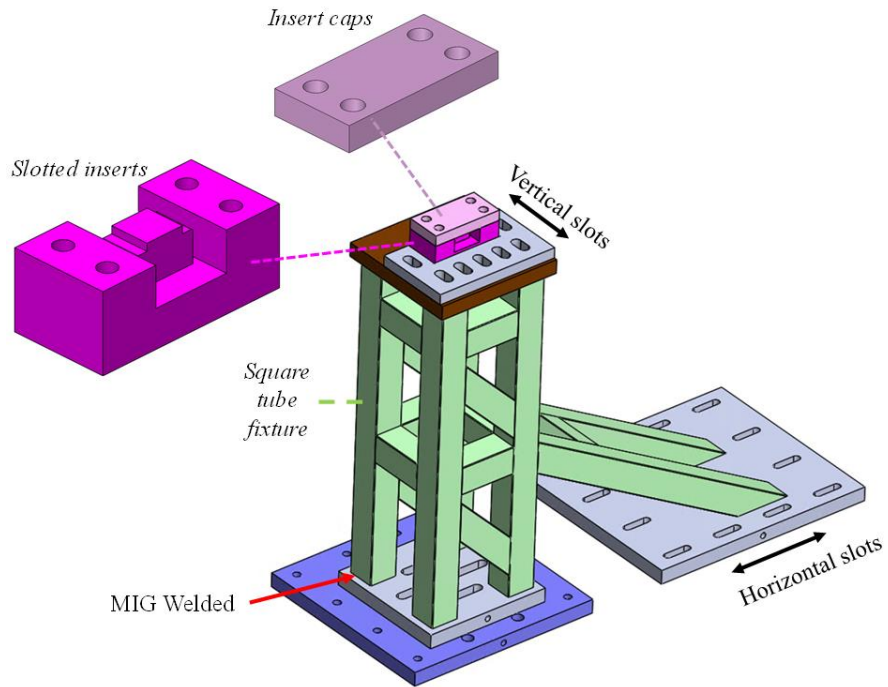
Side sill fixture that suspends the B-pillar used in impact testing
